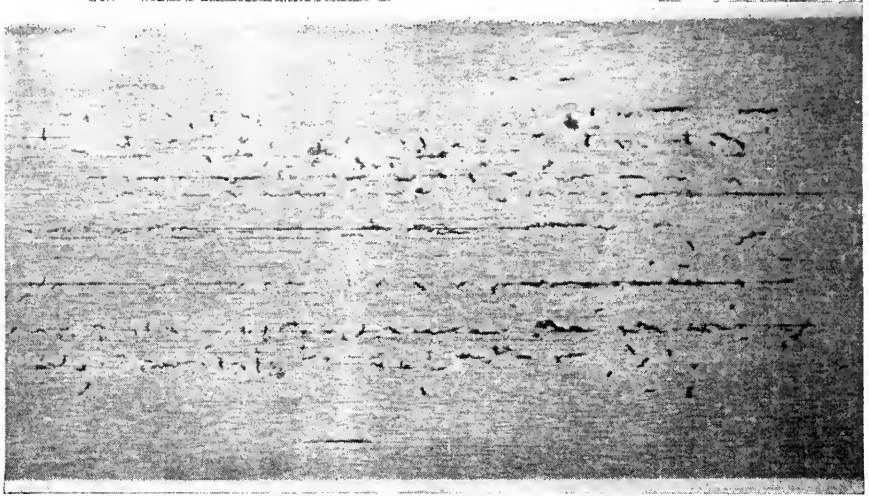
Typical Etch Test of an Air-Cooled, Hydrogen-Treated Rail Specimen.
